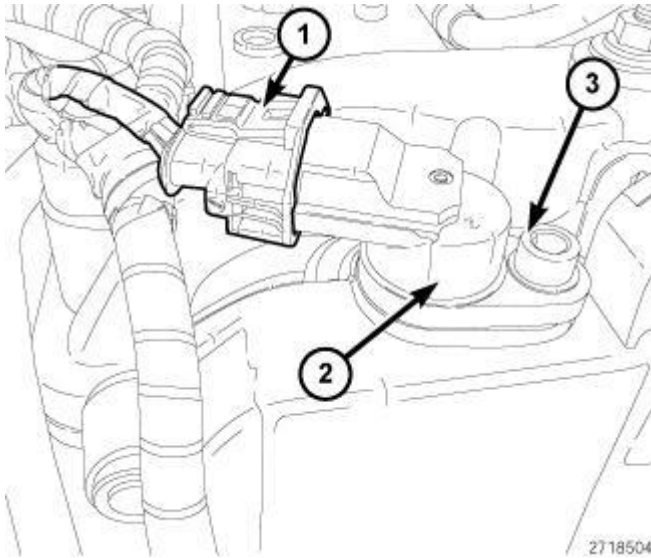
CAMSHAFT POSITION SENSOR HARNESS CONNECTOR
